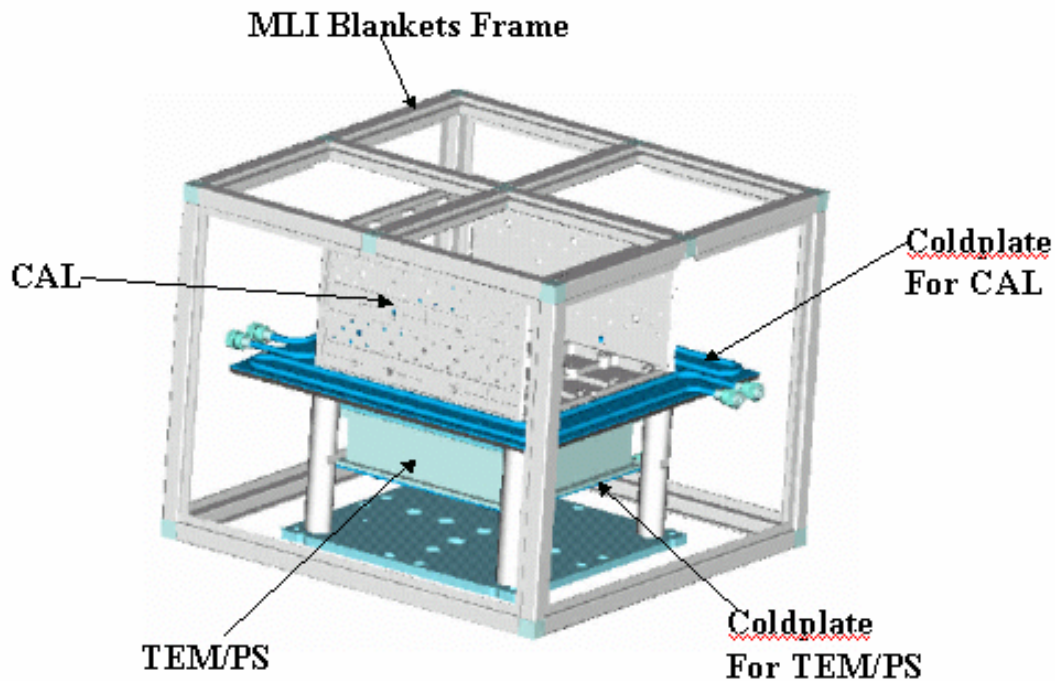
Test Fixture Set-up for Thermal Vacuum Test
